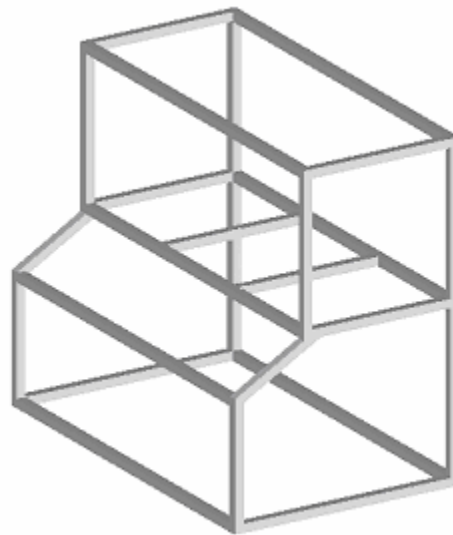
A CAD drawing of the frame for our exhibit.
